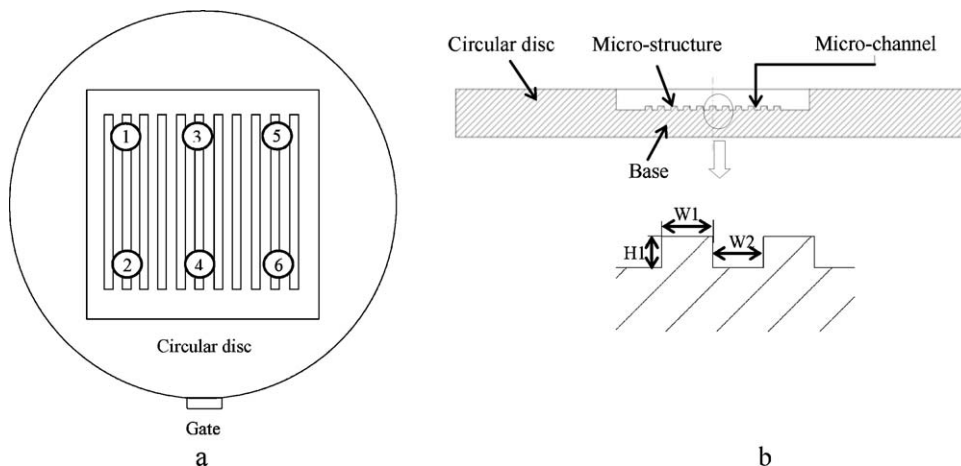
(a) Top view and (b) cross section of locations of dimensional measurements for the micro-channel part.
